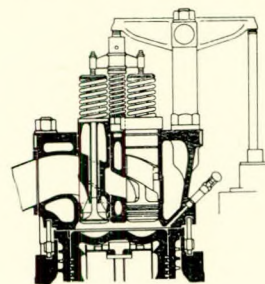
Single-cylinder test engine of 58-cm. bore equipped with four exhaust valves grouped around a central fuel injection valve
